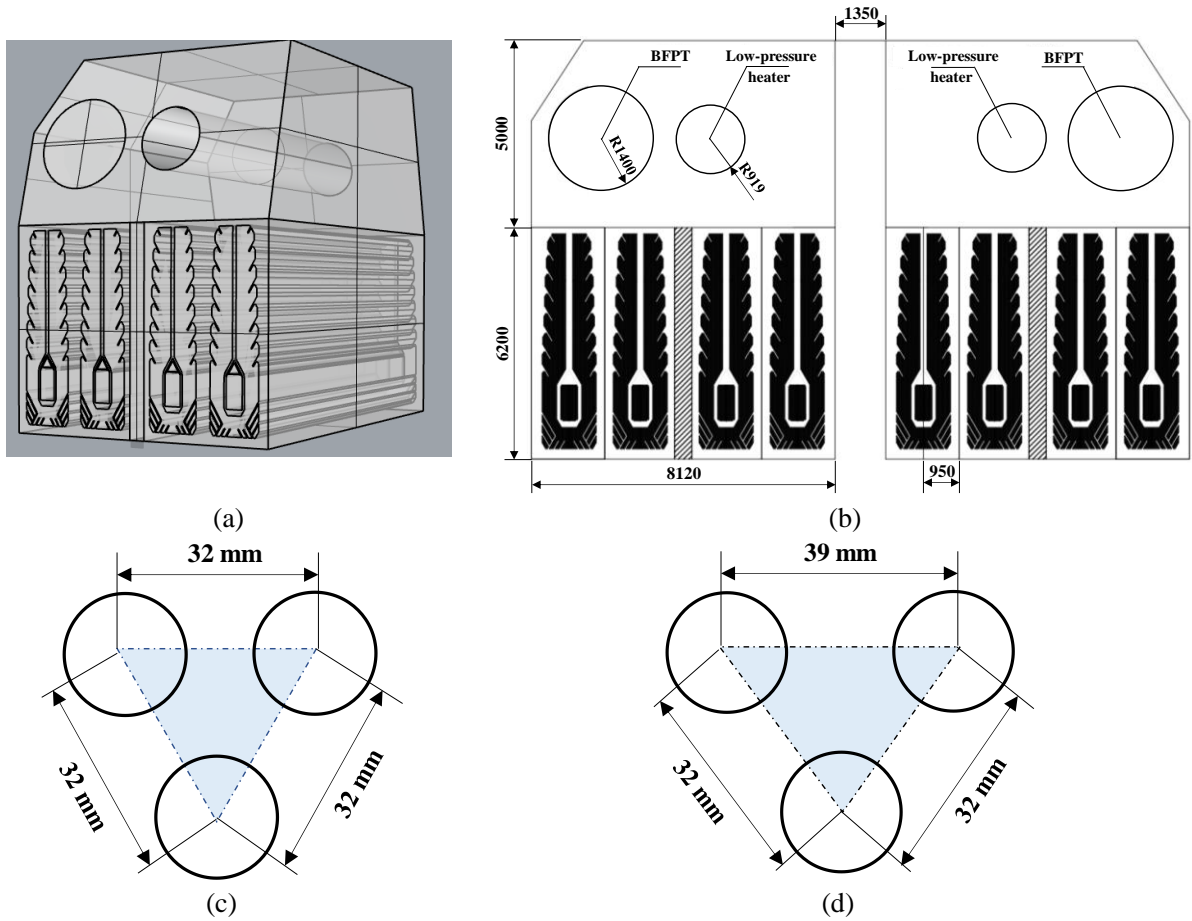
(a) 3D view of the investigated 1000 MW condenser; (b) The investigated 1000MW condenser (BFPT: boiler feed-water pump turbine); (c) schematic of the uniform tube bundle arrangement; (d) schematic of the non-uniform tube bundle arrangement
